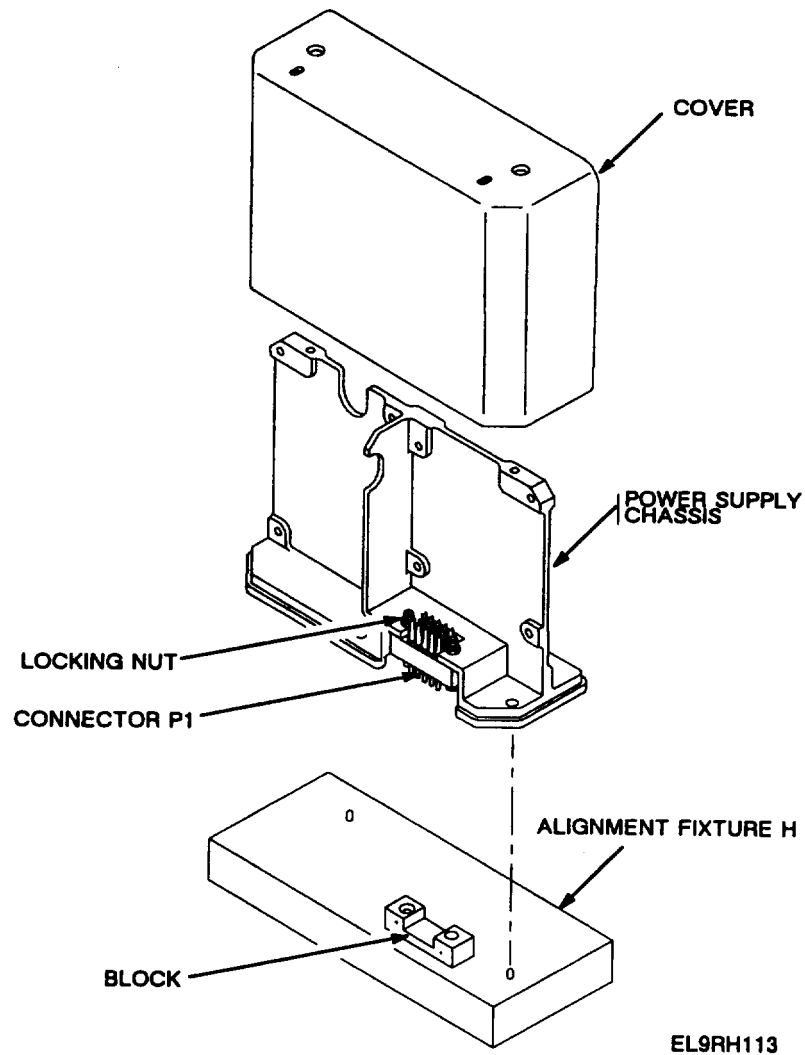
Alignment of Power Supply Assembly Connector P1.
